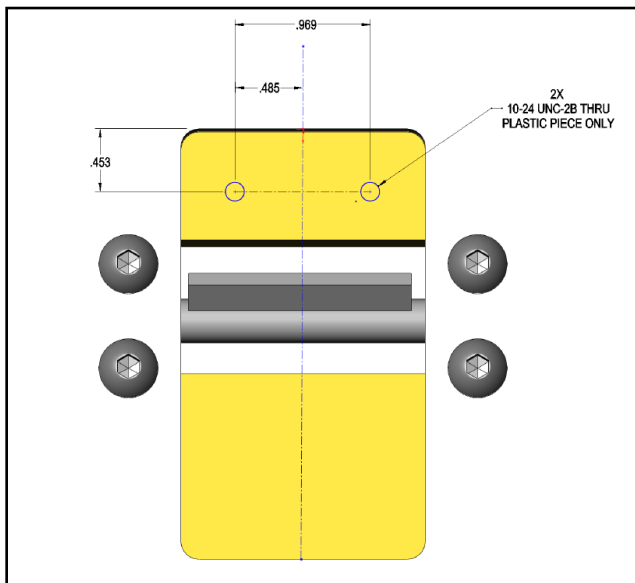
DRILL HOLE(S) LOCATION DETAIL
